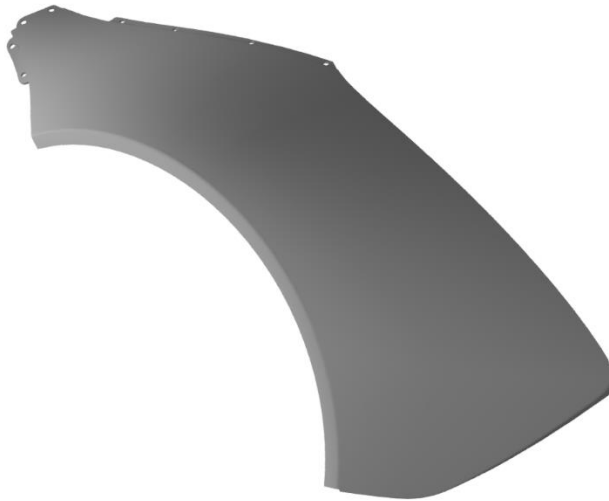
MOUNTING LOCATIONS ON FRONT FENDER
